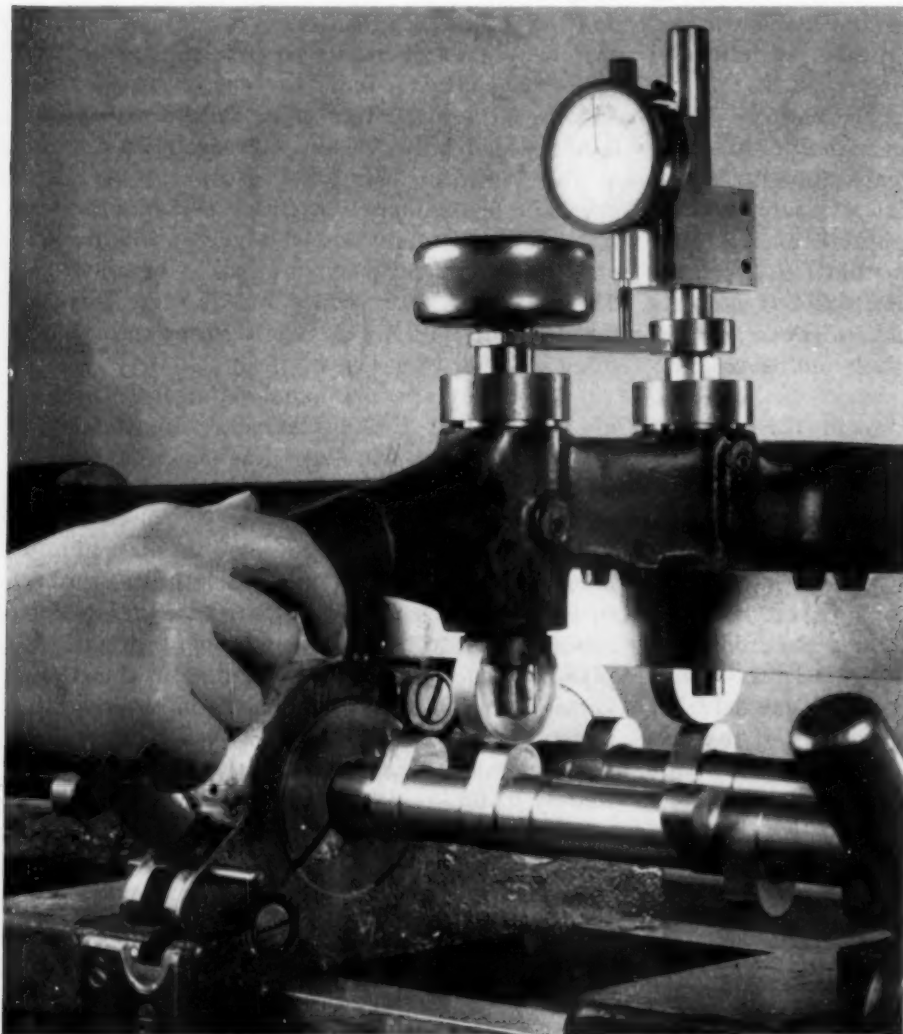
Close-Up of Gaging Rolls and Dial Head for Comparing Lobes on Camshaft to Master Shaft in Rear
